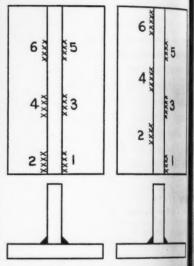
and Fig. 8—Examples of two sequents of welding often used to prevent accumulation of stresses and distortion.
